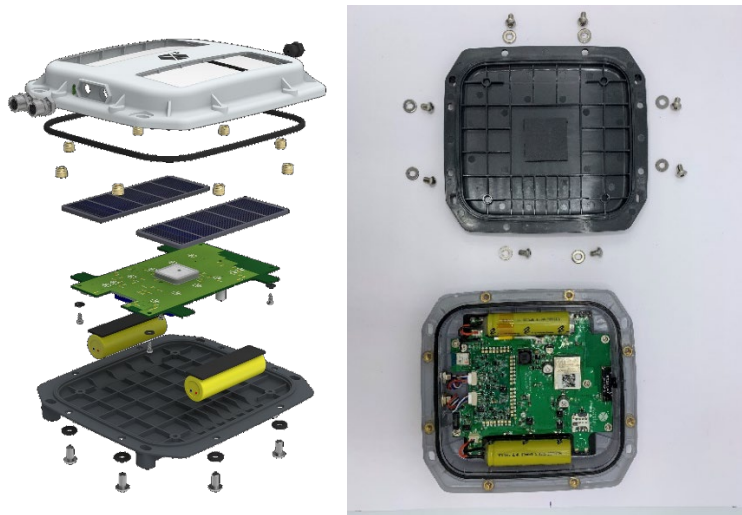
(a) Exploded of components; (b) Opening provides direct access to electronics
